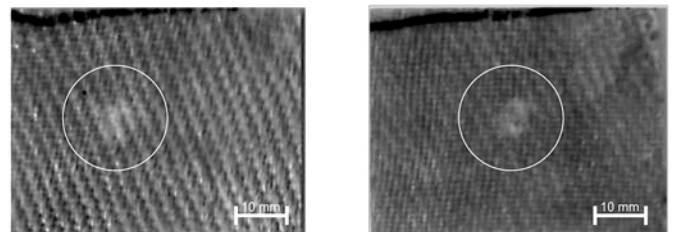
Specimens after an impact load of 2.5 J (inside)
